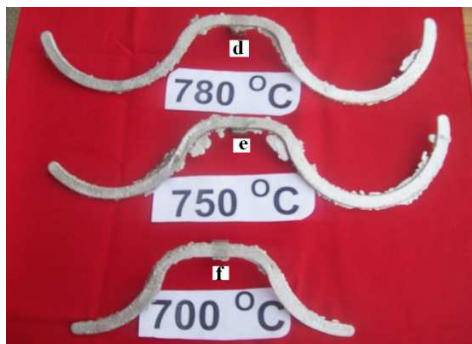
Spiral test casting of A713 alloy+ 25 per cent scrap addition, poured at d) 780 °C e) 750 °C f) 700 °C (Left side coated and right side un-coated)
